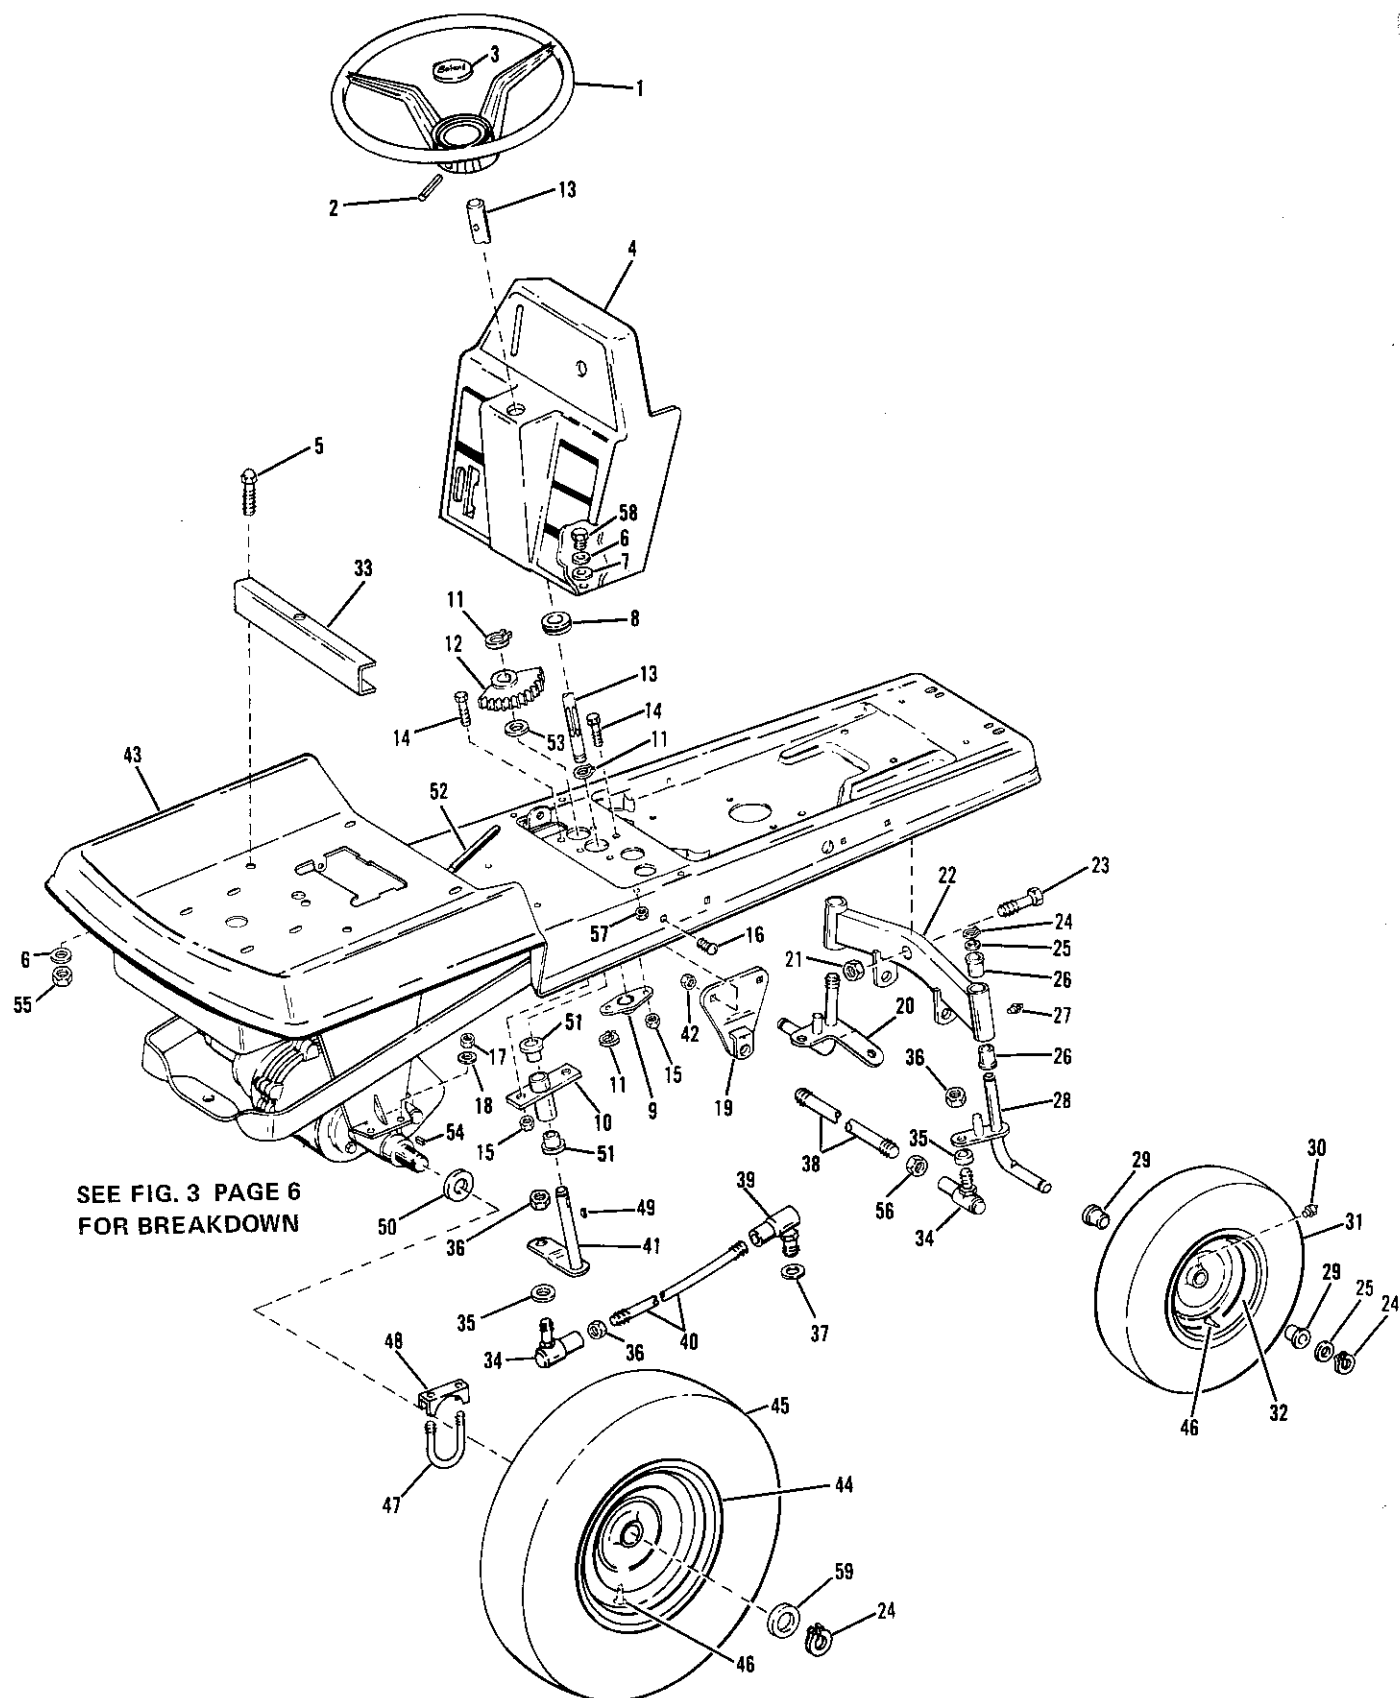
FRAME, STEERING AND AXLE ASSEMBLIES
